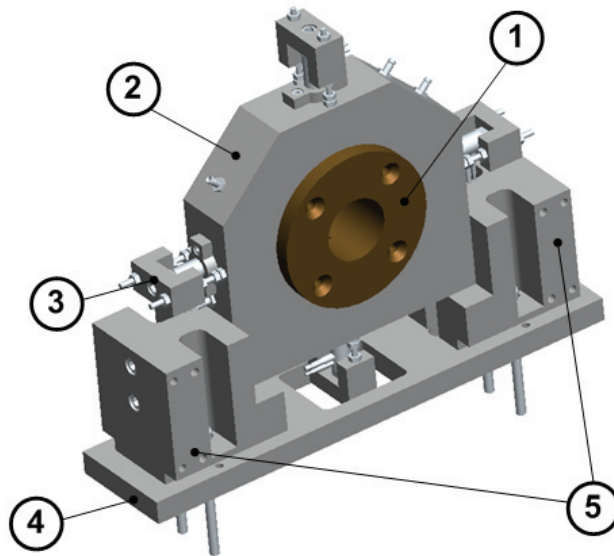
Isometric view of assembled gas journal bearing with four piezo actuators. 1 - Bronze sleeve, 2 - Aluminum housing, 3 - One of the piezo actuator, 4 - Sub-plate, 5 - Adjustable mounts.
